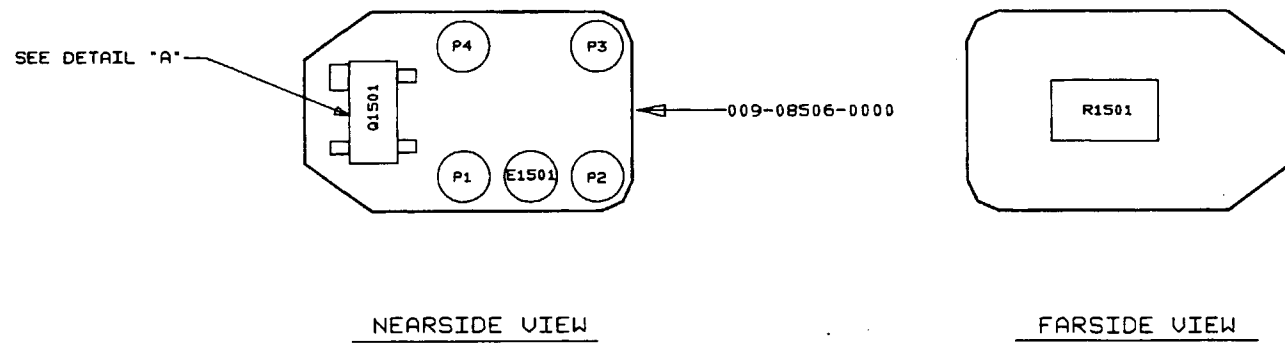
KR 87 RF AMP BOARD ASSEMBLY
